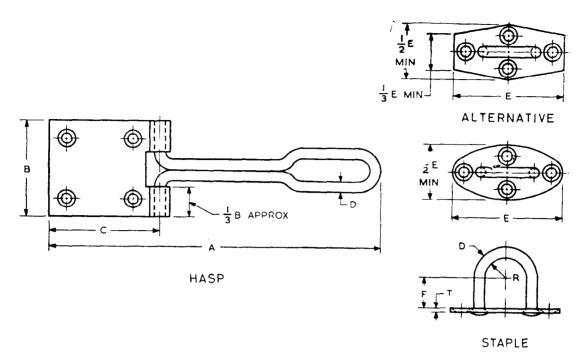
MILD STEEL HASPS AND STAPLES - WIRE TYPE
